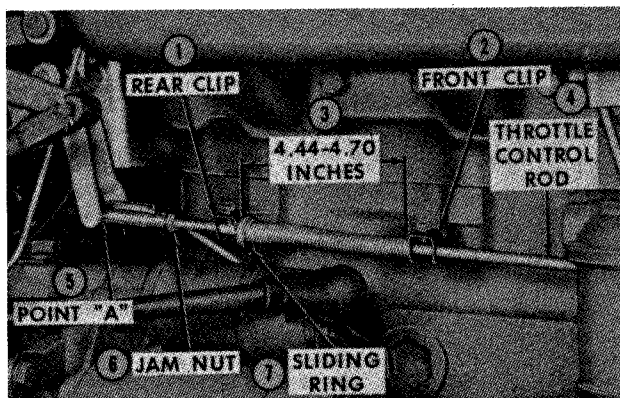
Adjusting points for throttle linkage are shown for all models except TW-10, TW-20 and TW-30. Linkage is adjusted to obtain desired engine high idle speed; pump is not fitted with high idle speed stop screw.
